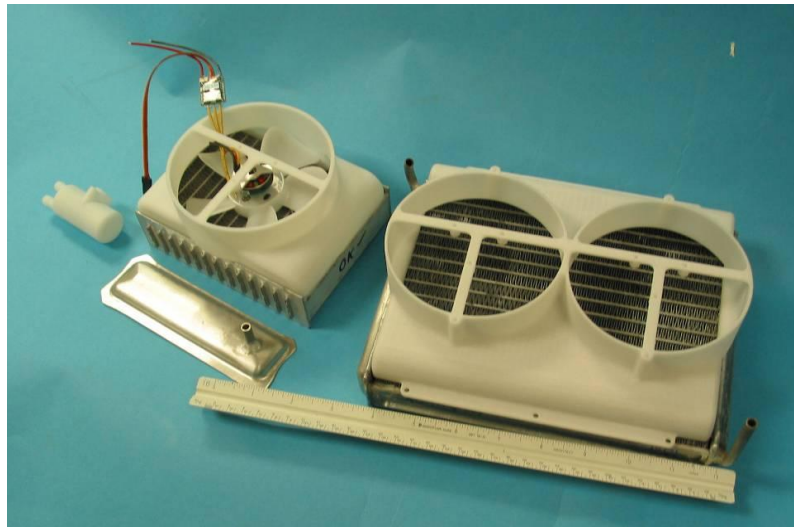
Radiators #7 (left) with the custom fan assembly and radiator #8 (right) with just the fan shroud. Also in the photograph are a tank for removing air from the coolant (white cylinder) and one of the custom stamped end tanks welded to the radiator cores at NRL.
